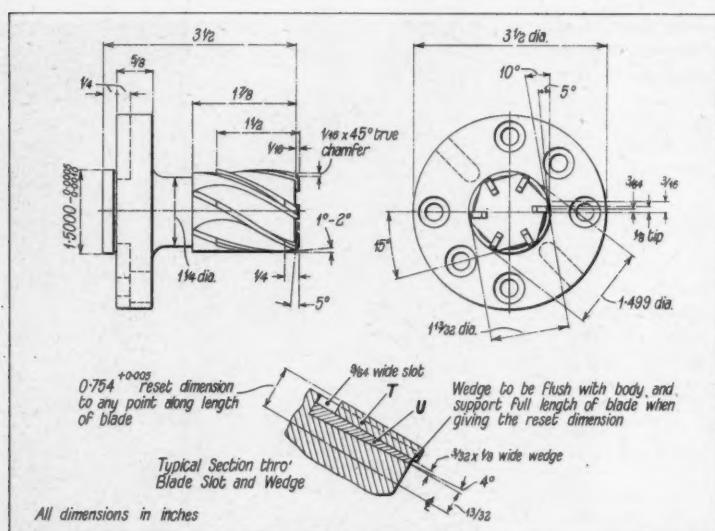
On the "Monotype" machine, both cams of a conjugate pair are machined simultaneously with a cutter that has helical inserted carbide teeth
